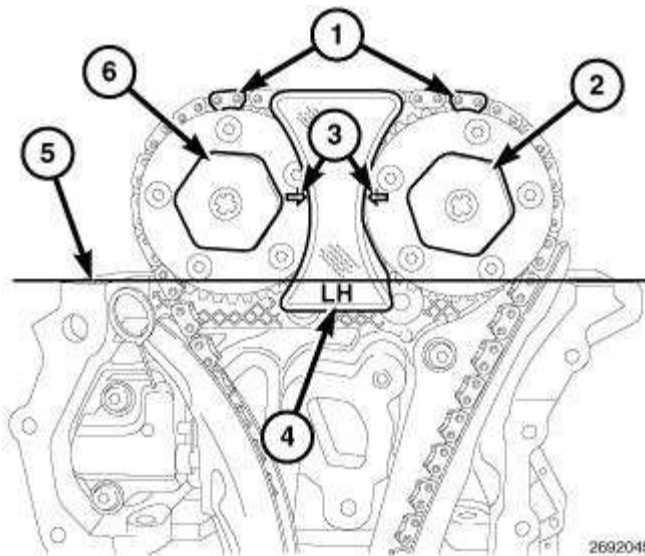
Phaser Timing Marks, Oil Control Valves & LH Camshaft Phaser Lock
